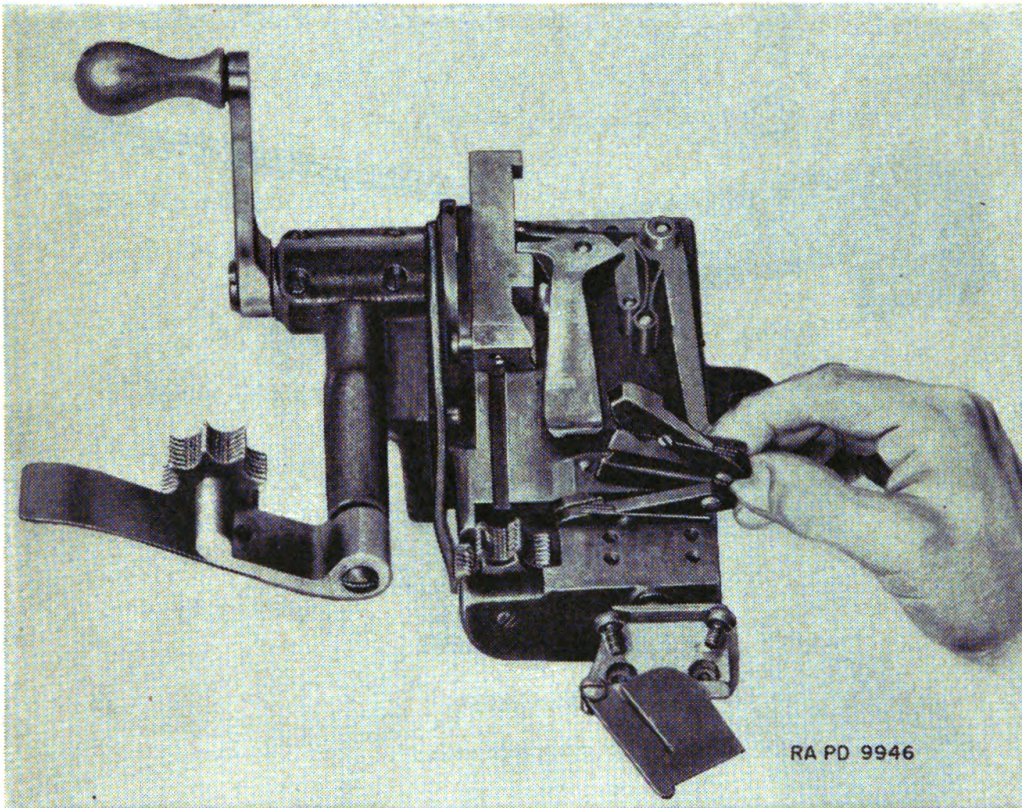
Browning belt-filling machine, caliber .30, M1918.
